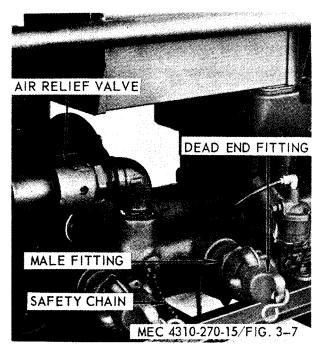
Air relief valve and quick disconnect fitting removal and installation.
